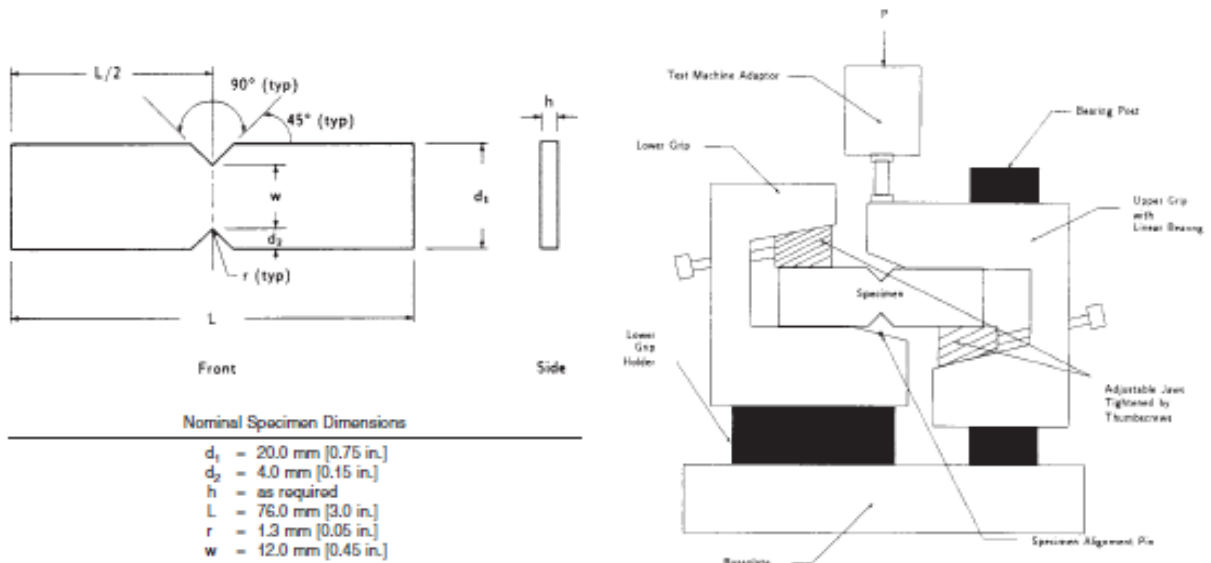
V-Notched Beam Test Coupon and Fixture Schematics<sup>15</sup>
